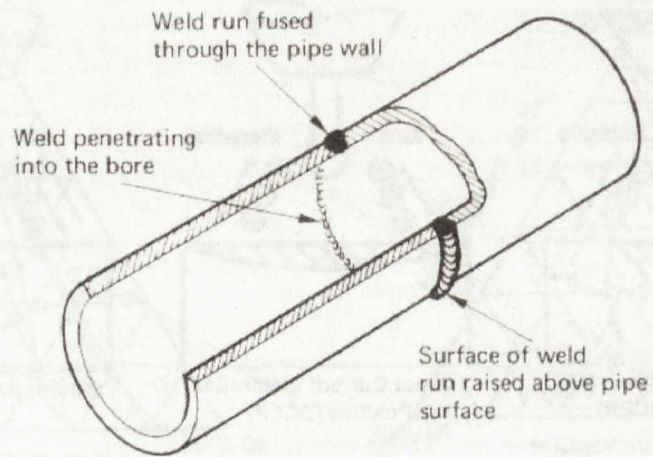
Butt weld of two pipes (butt - girth welded pipe) [27]
